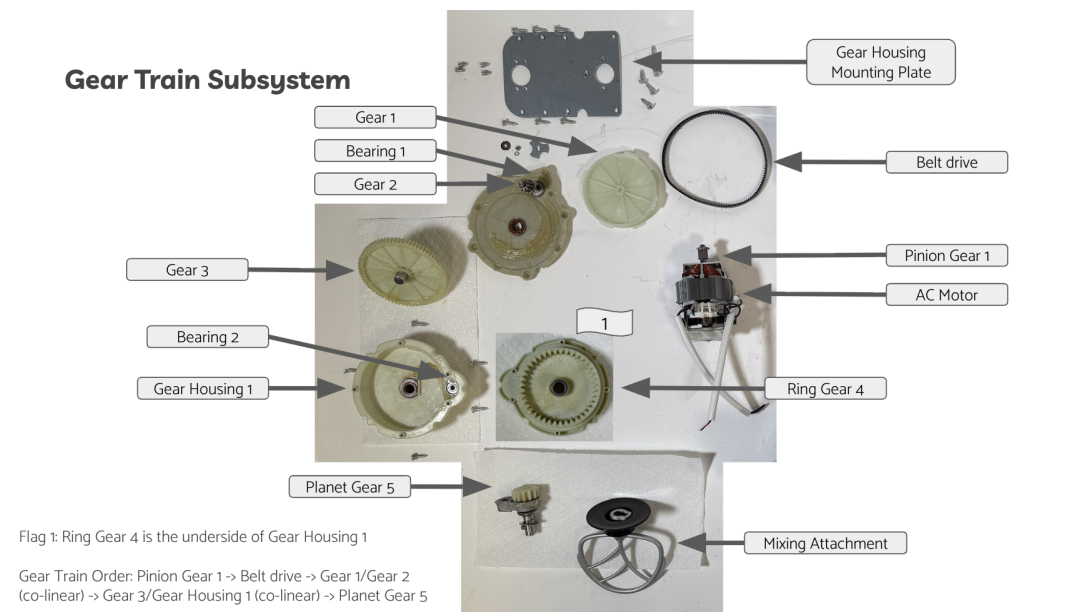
Disassembled gear train subsystem highlighting the bearings positioning in within the subsystem
